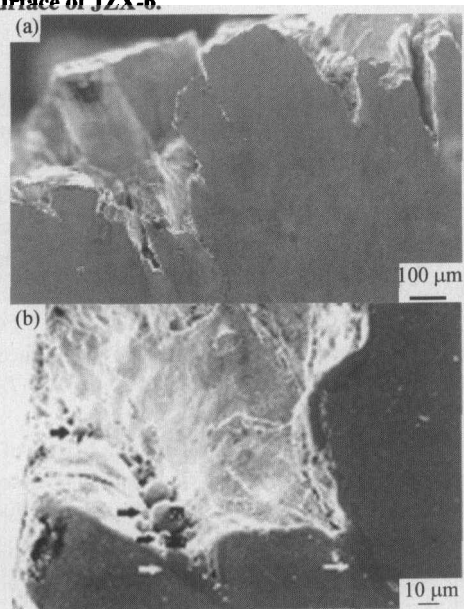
SEM photographs showing edge cracks on a transverse section of the low carbon strip, (a) transverse section features of edge cracks; (b) spherical particles of zinc and zinc-iron alloy in the edge cracks.
